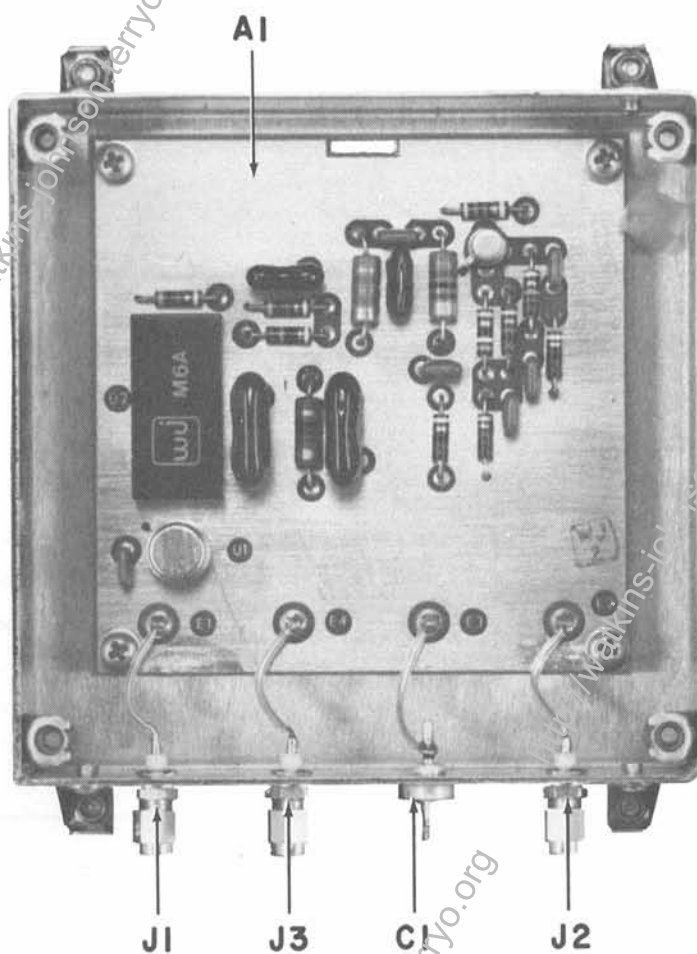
Type 796030 SMO Converter Assembly (A1), Location of Components
